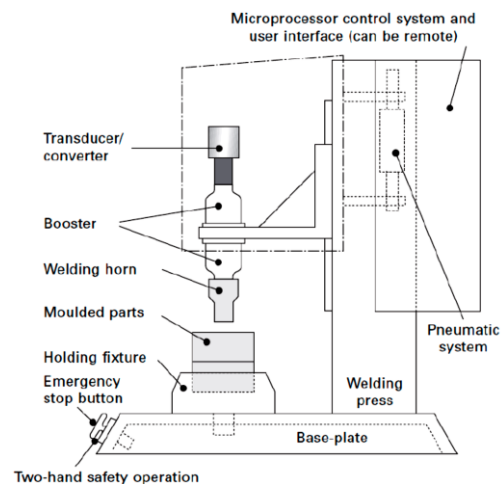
Schematic of ultrasonic welding equipment [13]
